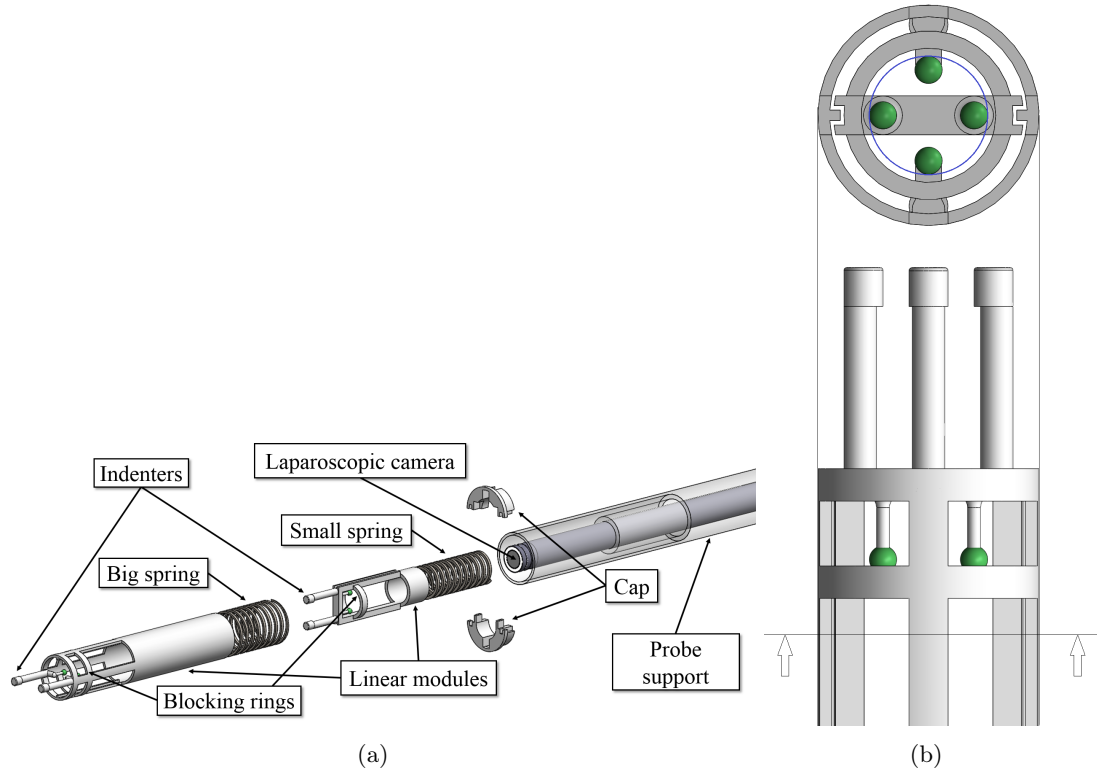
CAD Drawing of the Vision-based Stiffness sensor: (a) Exploded view and (b) Section view showing the camera Field of View (FOV).
